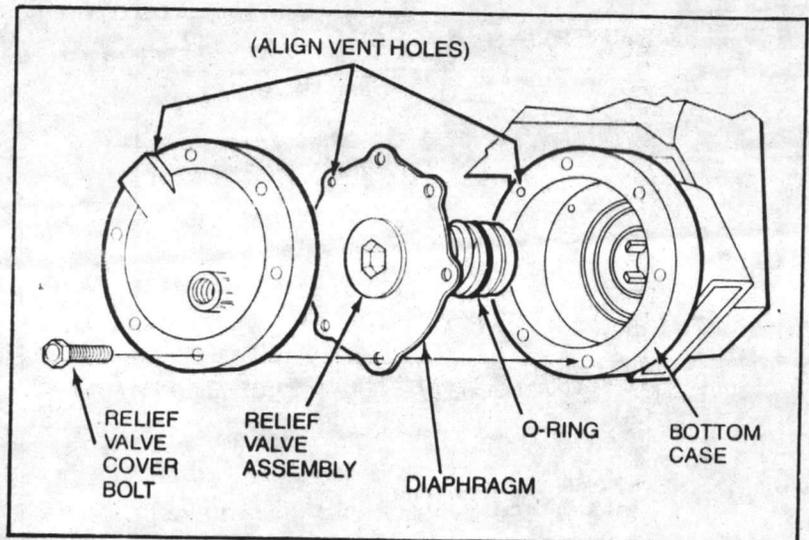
B. RELIEF VALVE ASSEMBLY FRP-II
